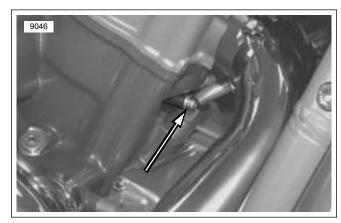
Front Cylinder Coolant Drain Plug @ 9.7 Nm (86 in-lbs)
